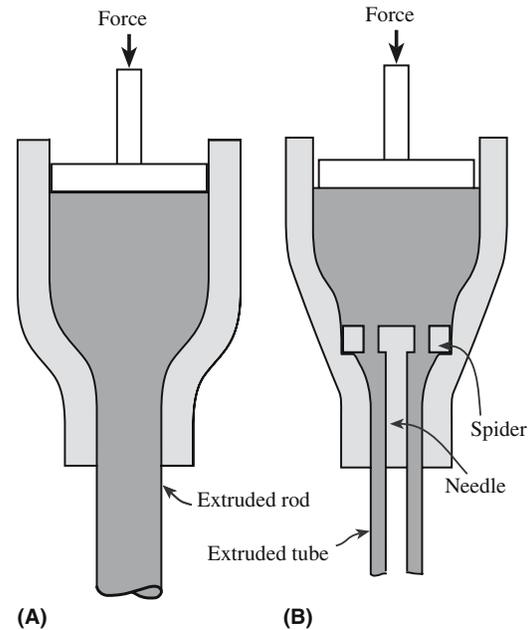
Extrusion of (a) a rod and (b) a tube.
